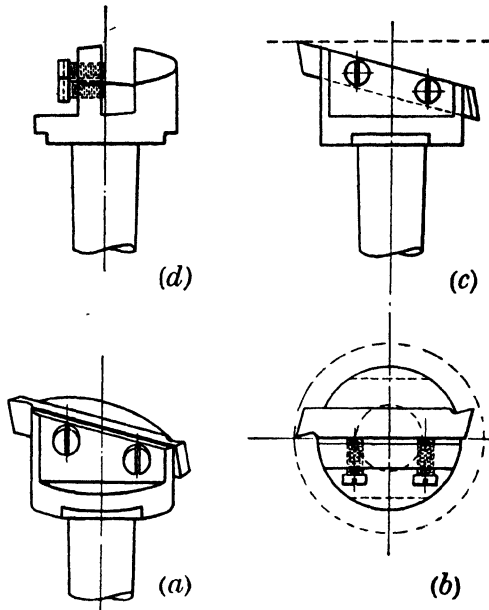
One-tooth milling cutter-holder: (a) perspective, (b) end-view, (c) and (d) side elevations at right angles to each other.
